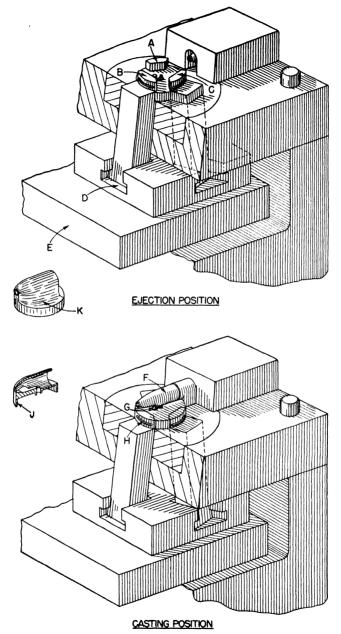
Ejector half of a die-casting die in which a collapsible core is utilized to cast internal threads.
